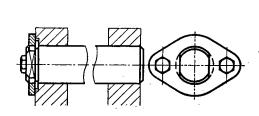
Pivot pin fixed against axial and angular displacements by end plate with contoured hole and retaining ring
